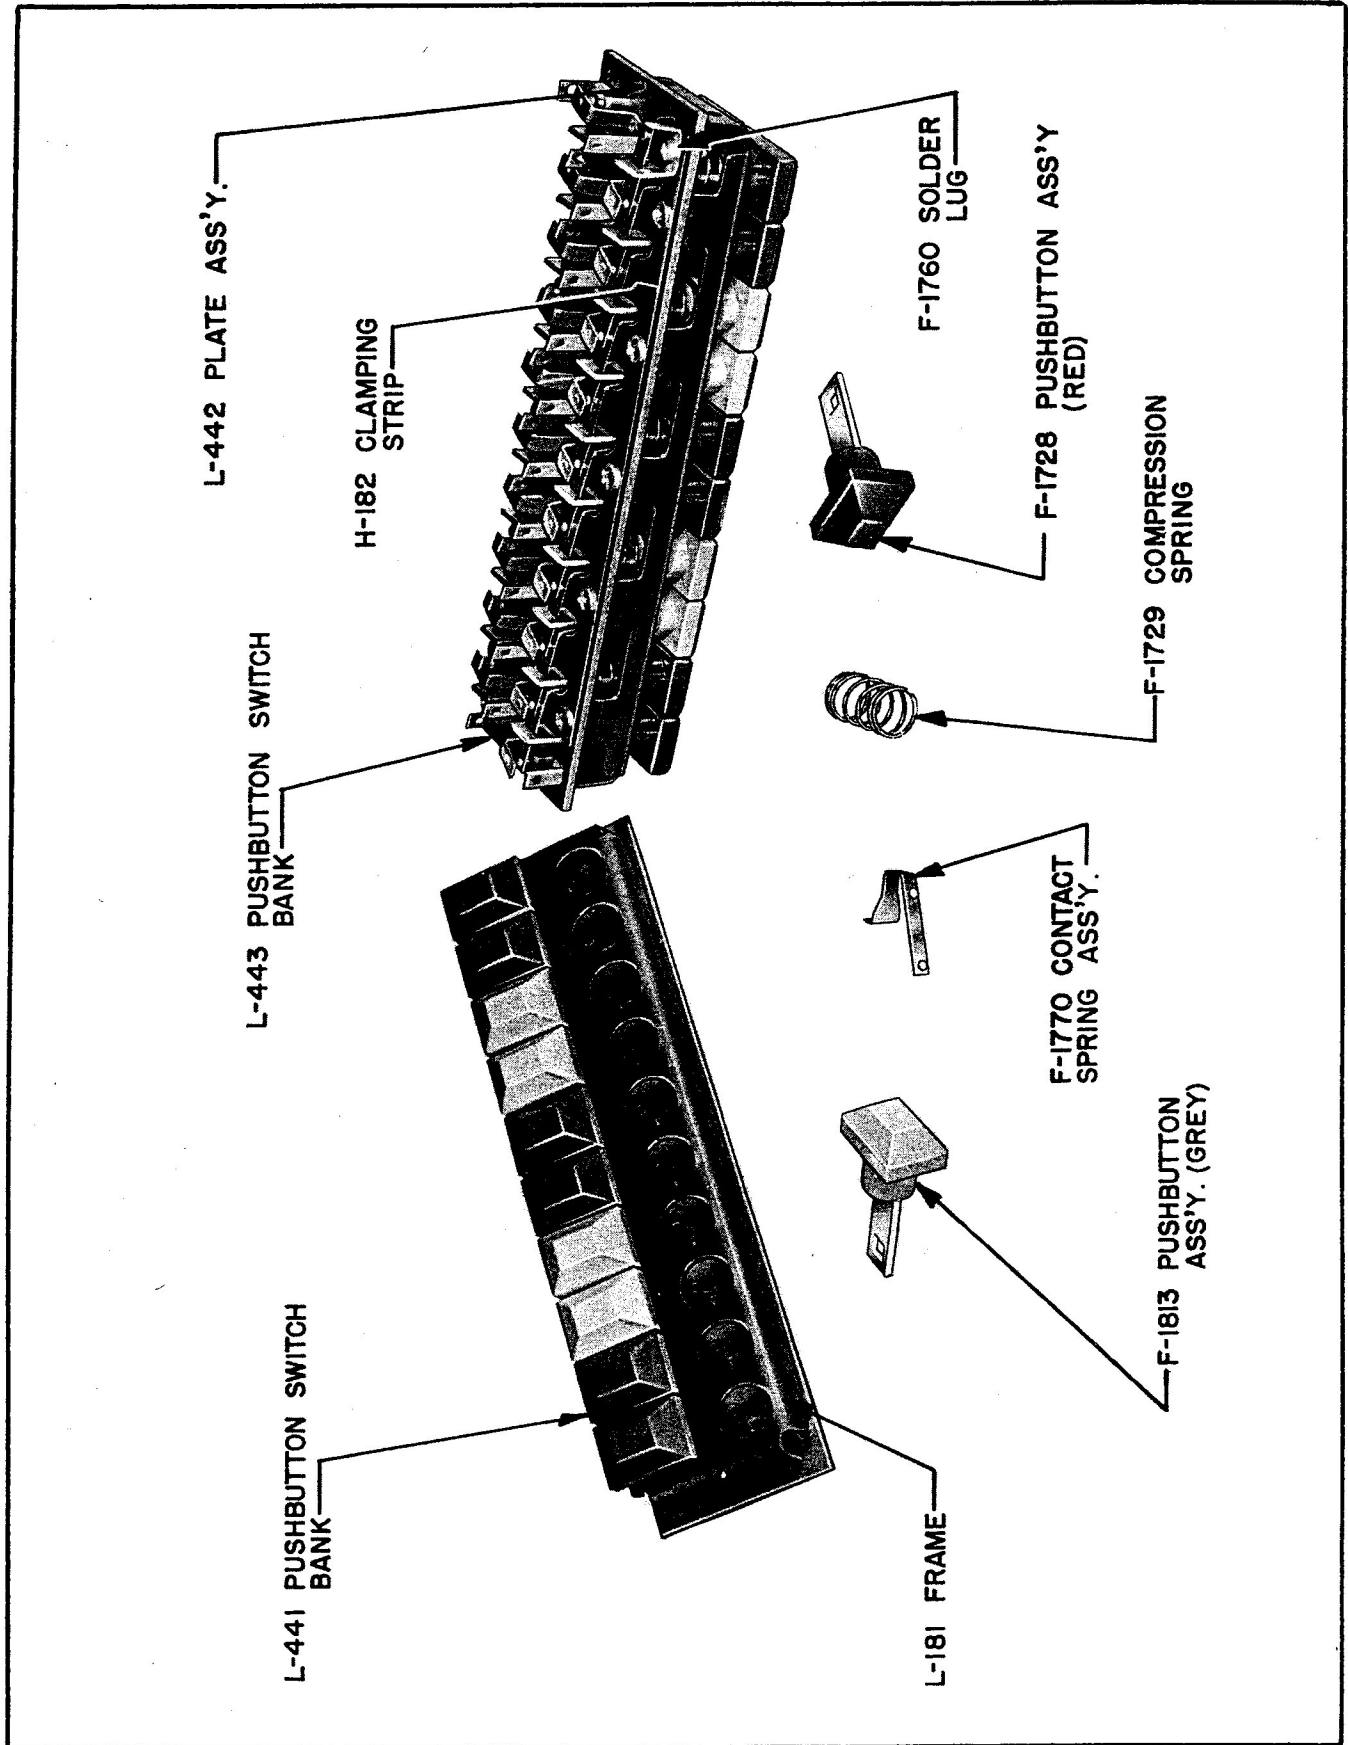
PUSHBUTTON SWITCH BANK ASSEMBLY
